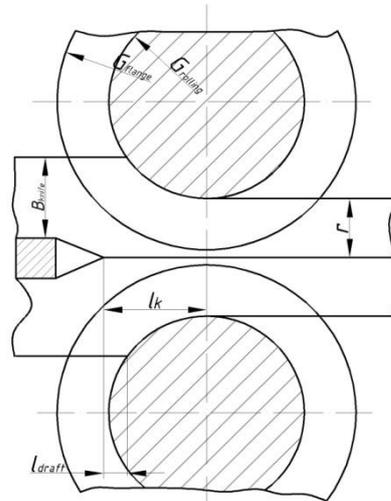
Diagram of upsetting edges when welding a pipe billet of radius r :
